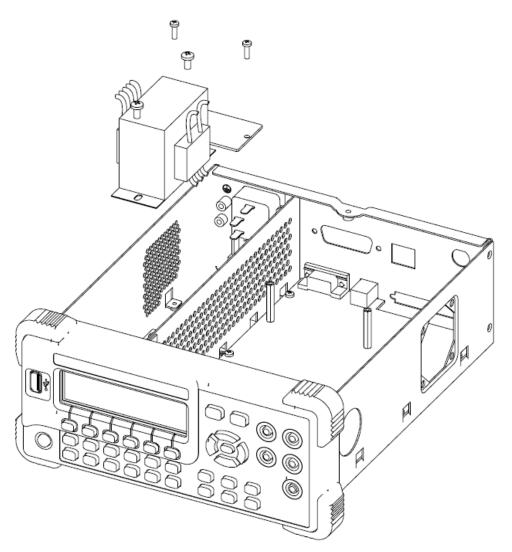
The Schematic of Disassembling and Assembling Filter Board and Transformer
